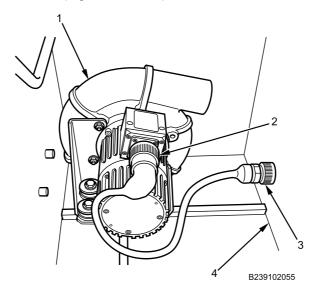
HVAC/LSS Main Blower Motor Wiring Harness.
